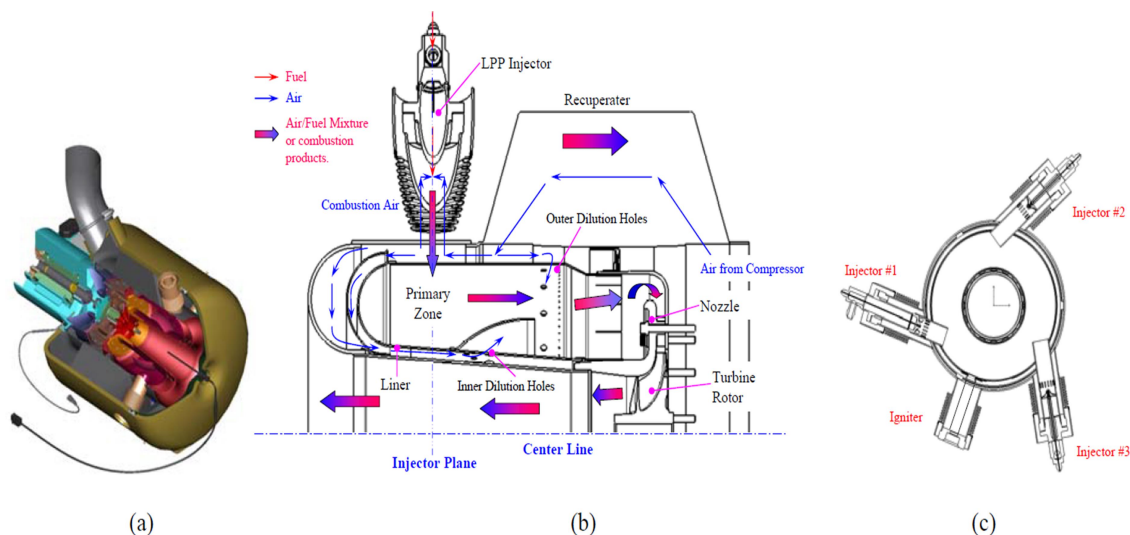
a) Isometric View of C30 MicroTurbine Engine without Fuel Injectors; b) C30 Combustor Cross Section View with Air/Fuel Flow Indicated; c) Injector Arrangement
